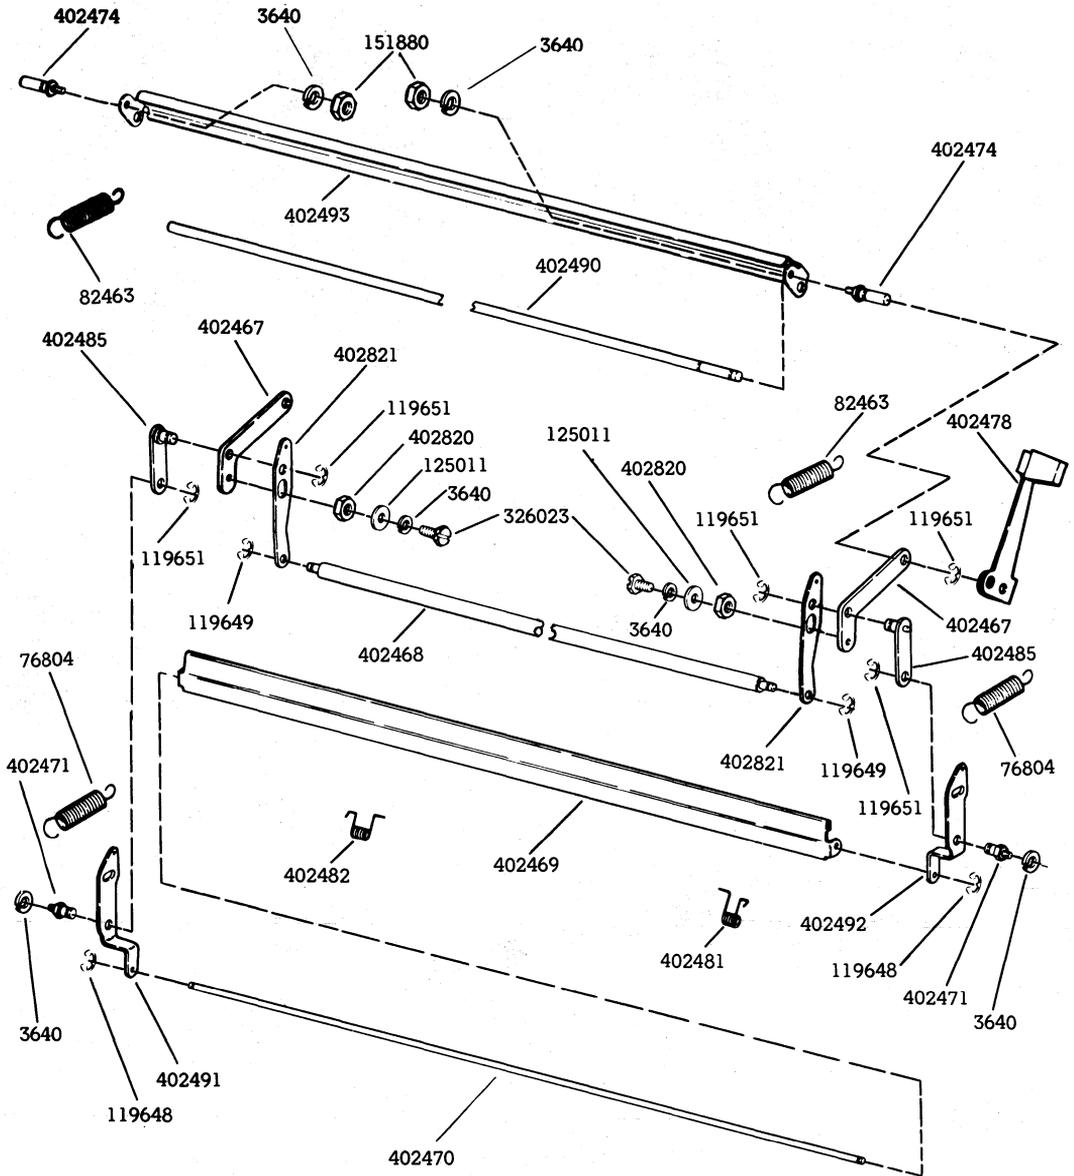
402460 Paper Handling Assembly (Tractor Feed - 80-Column) (Cont.)
